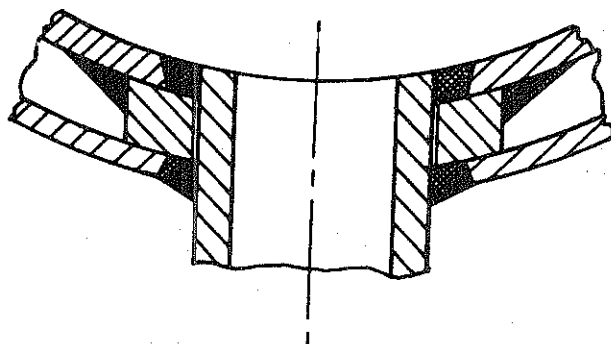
Bottom outlet pipe with reinforcing ring welded to head and jacket
